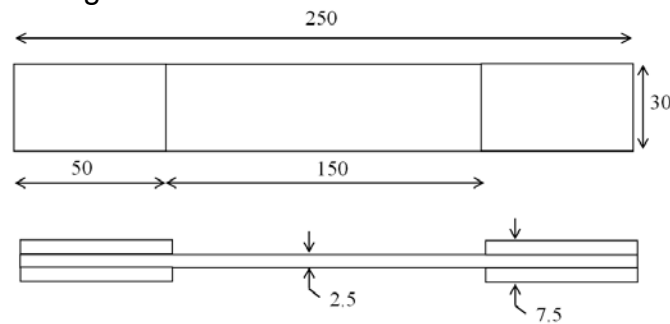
Dimensions of the used tensile coupon, equipped with straight-end tabs.
